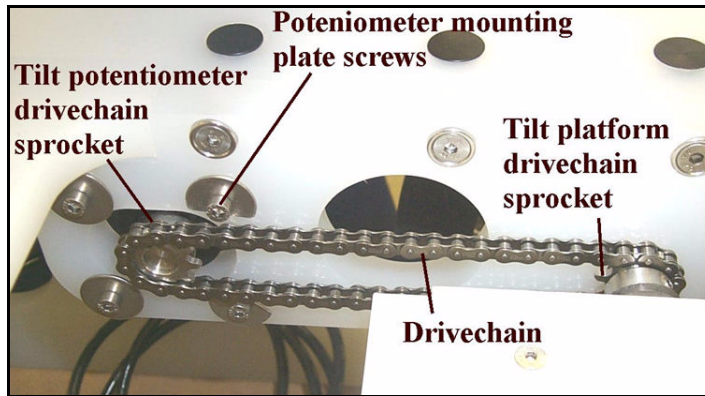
Tilt Platform Drive Chain and Sprockets
